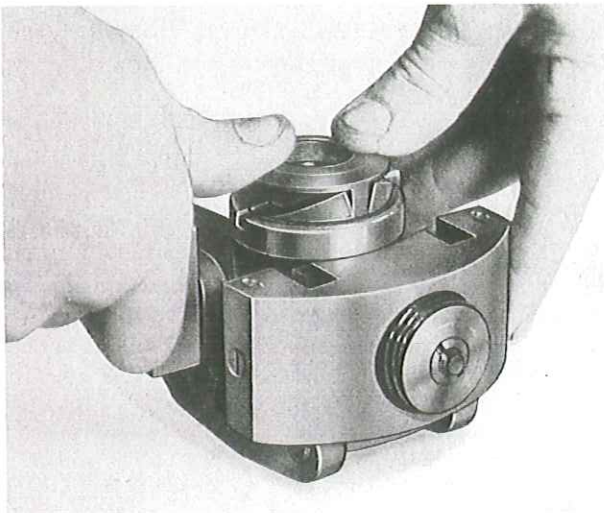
Fitting the vibration damper to the flyweights. (Note relative positions of rubber blocks).
